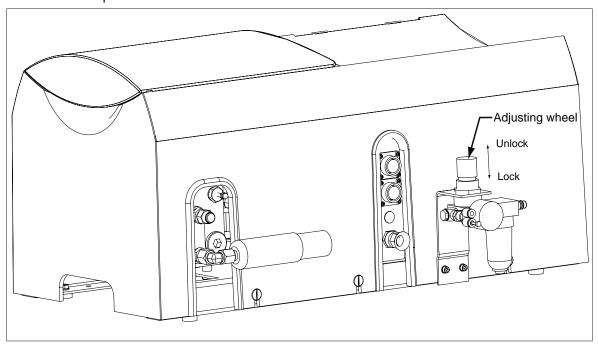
/1 Adjusting wheel for spray air setting (HS version)
